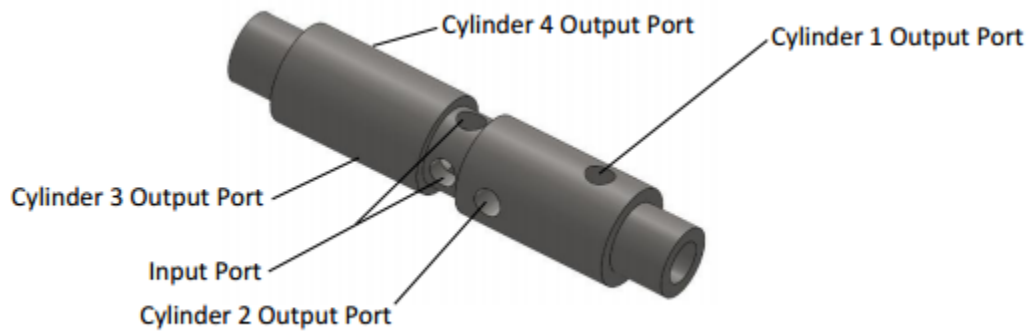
Chermesnok's rotary spool shaft with four outputs and a center input groove[12]
